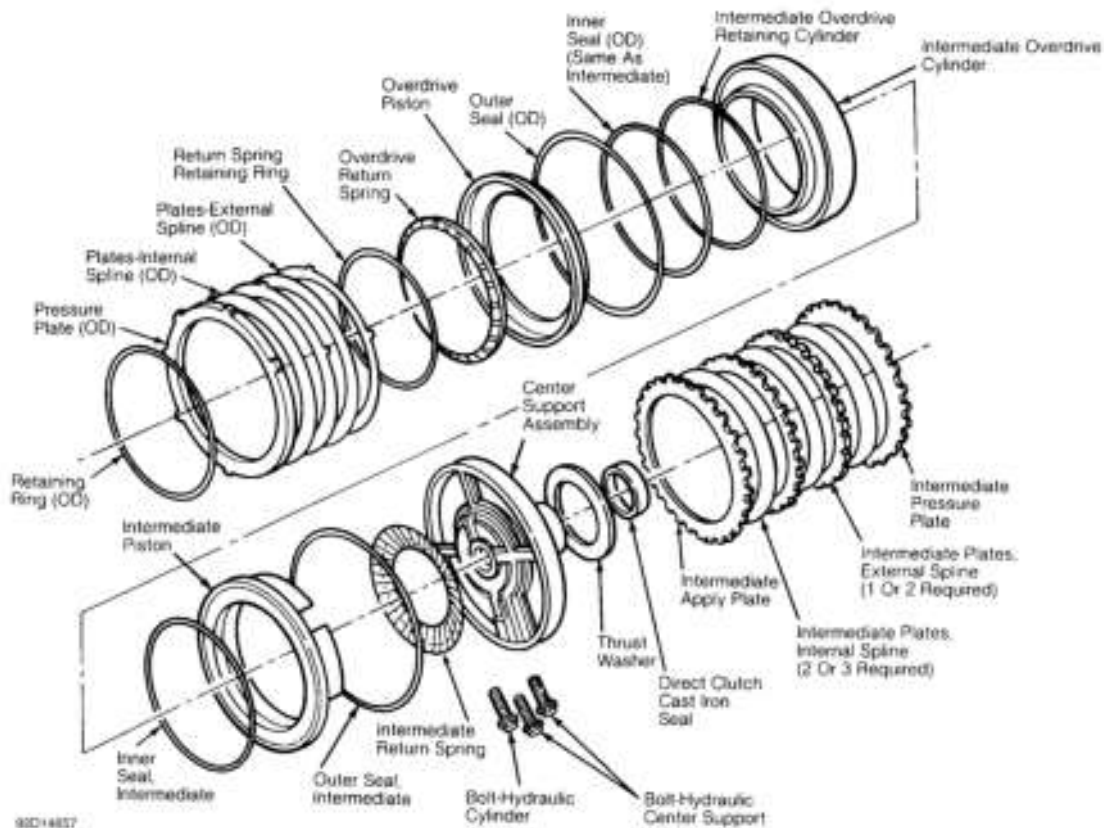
Exploded View Of Intermediate-Overdrive Cylinder
